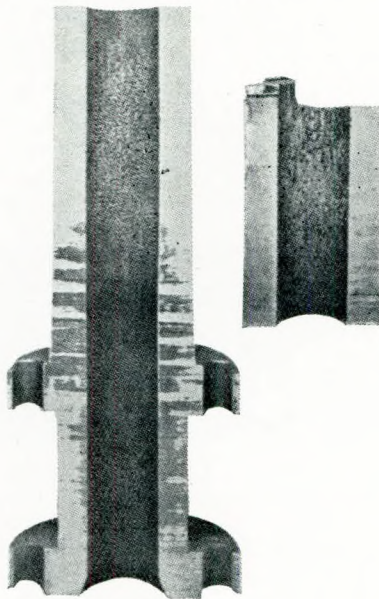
S.M. steel. Large bore. Heavy corrosion.
